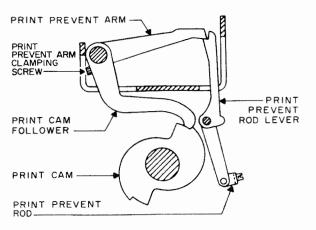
Print Prevent Arm Engaged With Print Prevent Rod Lever
